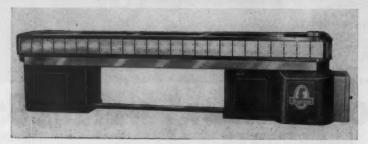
Ferguson straight-line machine having forty stations for manufacturing and assembling small parts
